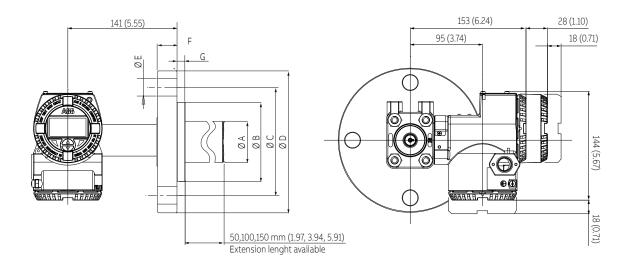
266DRH with DIN housing and direct mount seal S26RA/S26RE/S26RJ rotating flange Raised Face extended diaphragm (For dimensions of S26 seals refer to the S26 datasheet)
